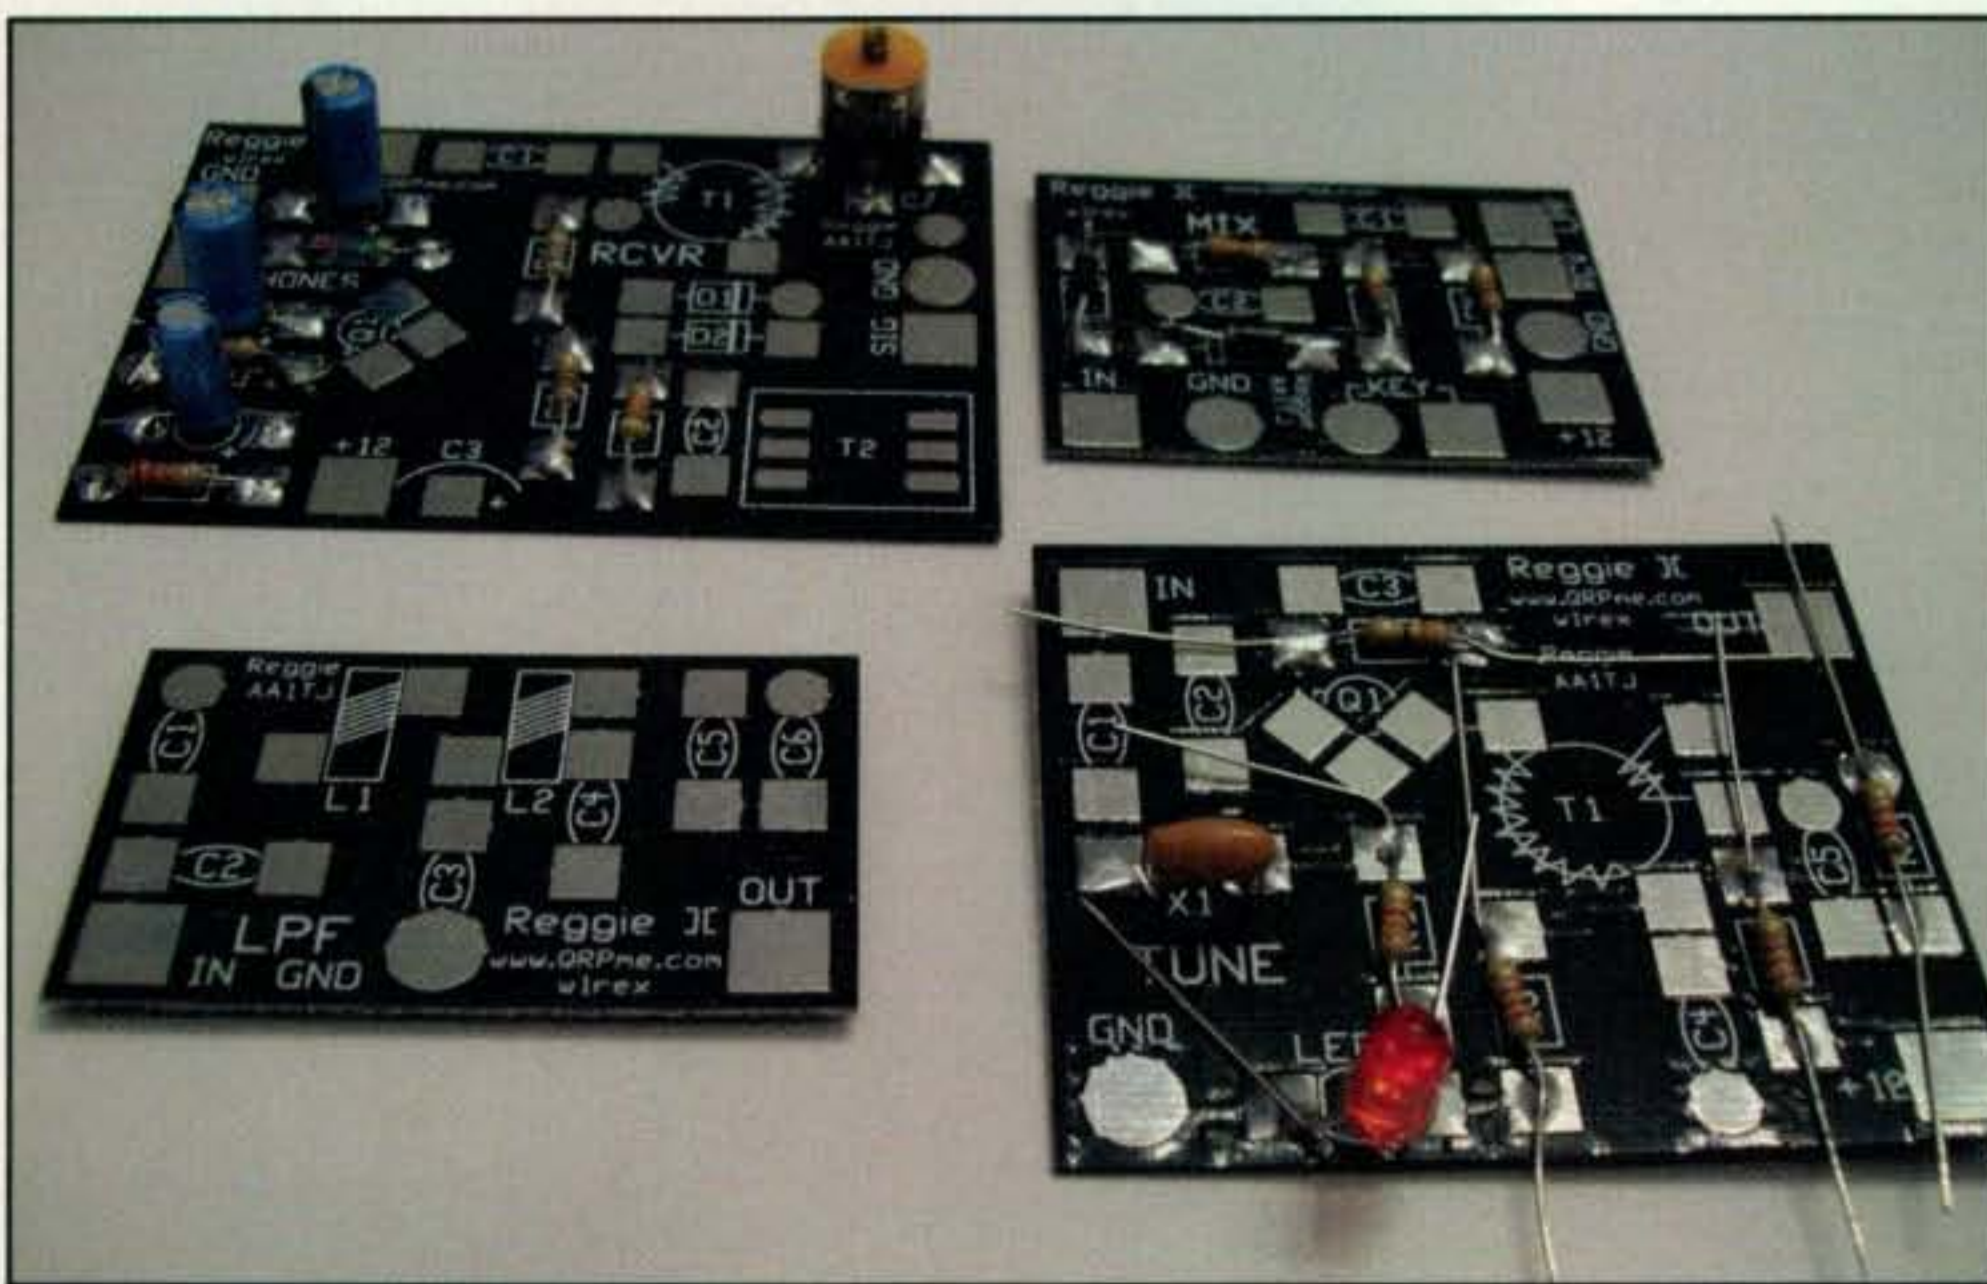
Photo F- Here is the Reggie II approximately midway through assembly. I purposely left some wires untrimmed on one board to show my "install components, then trim their leads" process.
